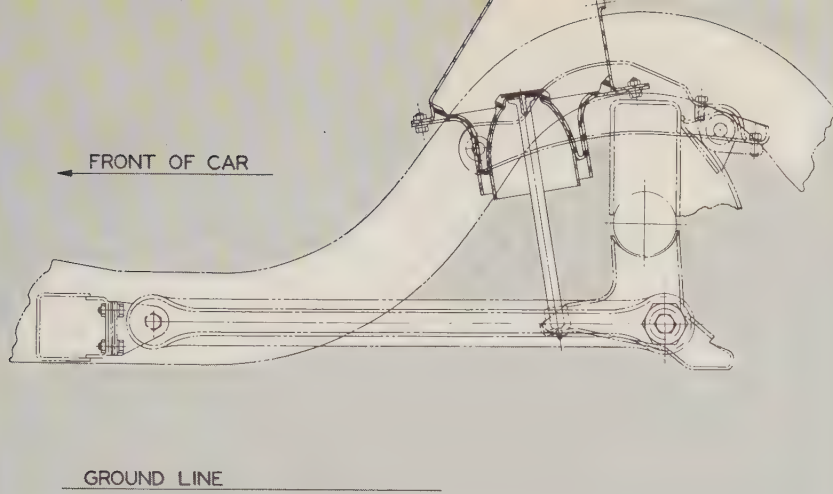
The rear suspension design is a four-link system. The lower control arms are parallel to the center line of the car and are attached to a frame outrigger and a bracket on the rear axle housing. The upper control arm is a solid yoke which provides a better design for connecting to the new tubular center X-frame. Rubber bushings are used in the connections at the front ends of both the lower and upper control arms. Ball joints are used to attach the rear ends of the control arms to axle housing brackets. This combination of bushings and ball joints on the arms provides durability, freedom in roll, and assures noise isolation.
